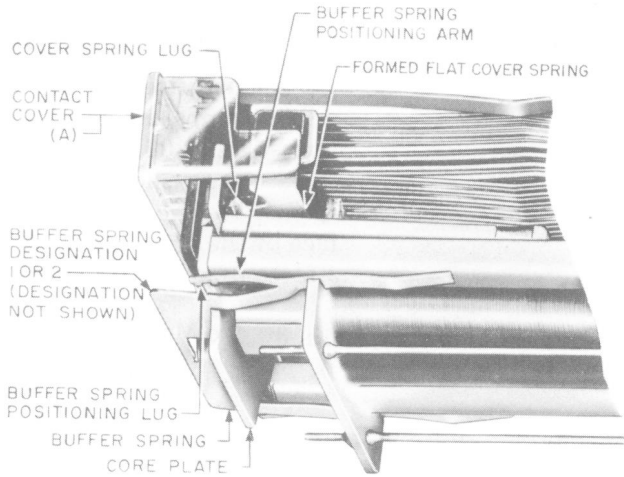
AL Type Relay Showing Contact Cover and Buffer Spring
